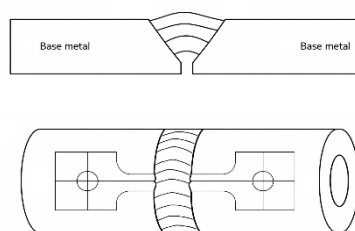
TIG welding operation performed on AISI 304 stainless steel plates.
